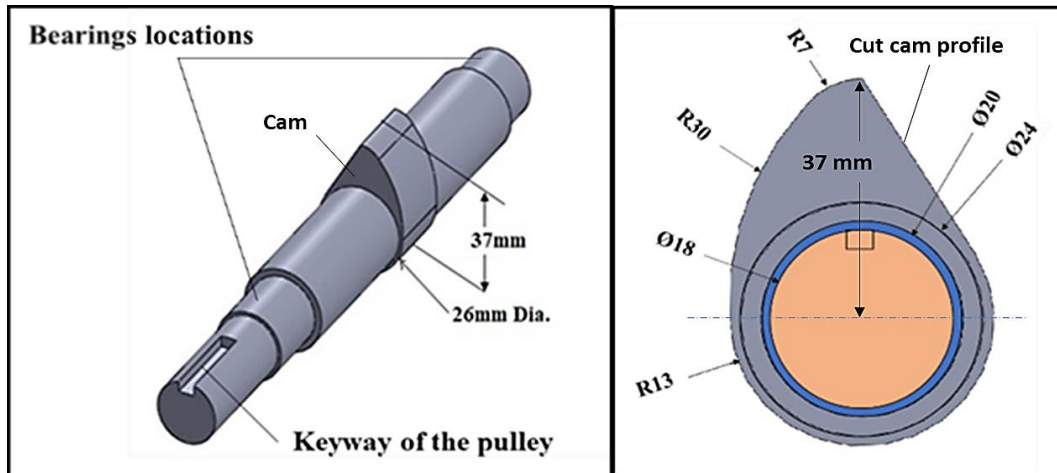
Camshaft details (left) and cam dimensions (right).
